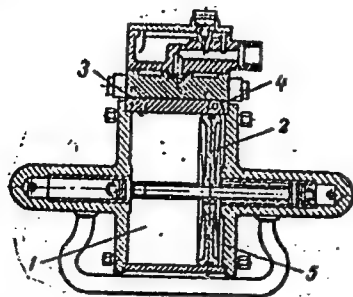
1 - pneumatic cylinder; 2 - piston; 3 and 4 - checking devices; 5 - blades
